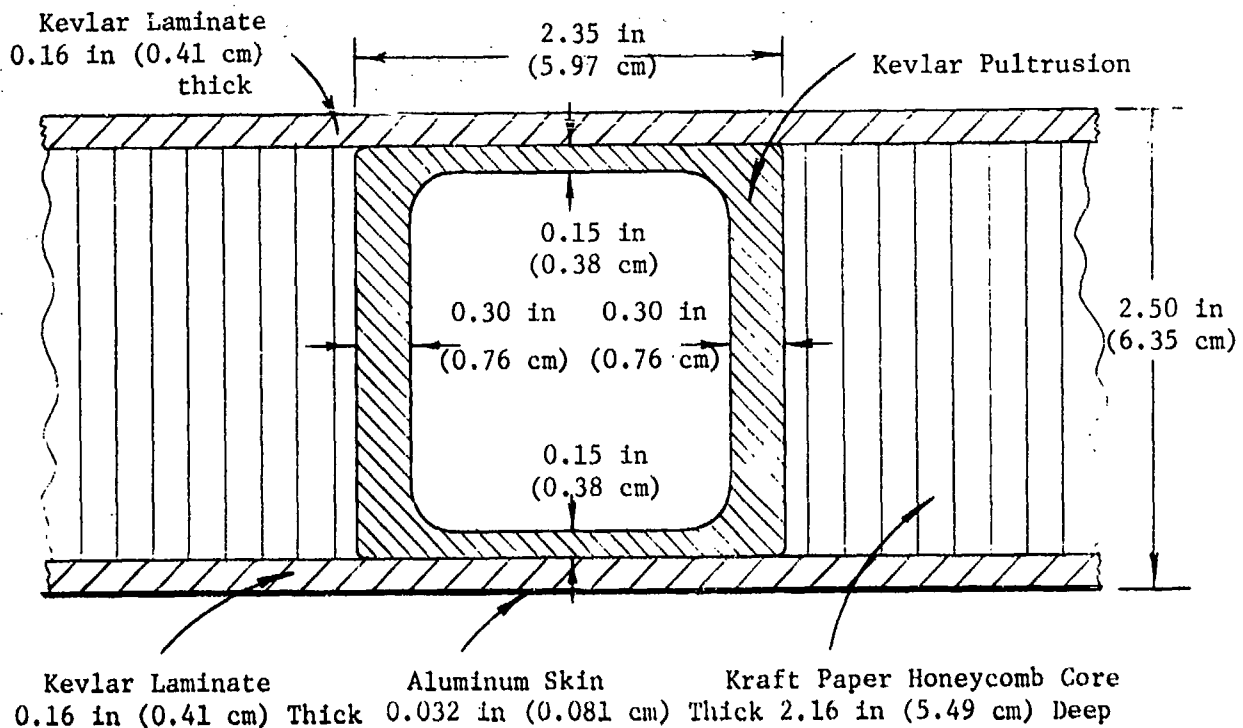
Wall Section at Box Stiffener Location for A-Shelter
